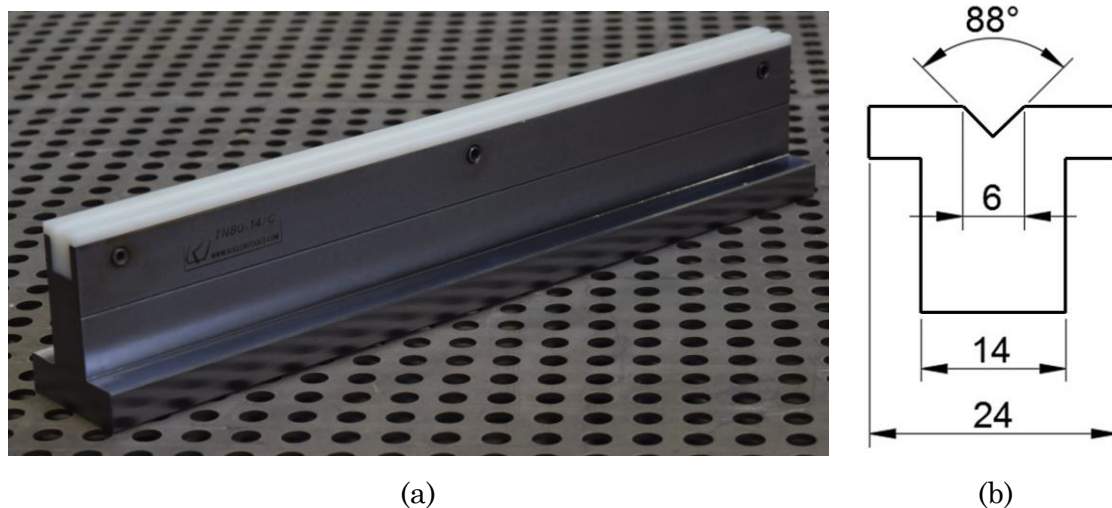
5: metal frame with nylon insert TN80-14-C (a) with geometrical dimensions of the insert (b).
